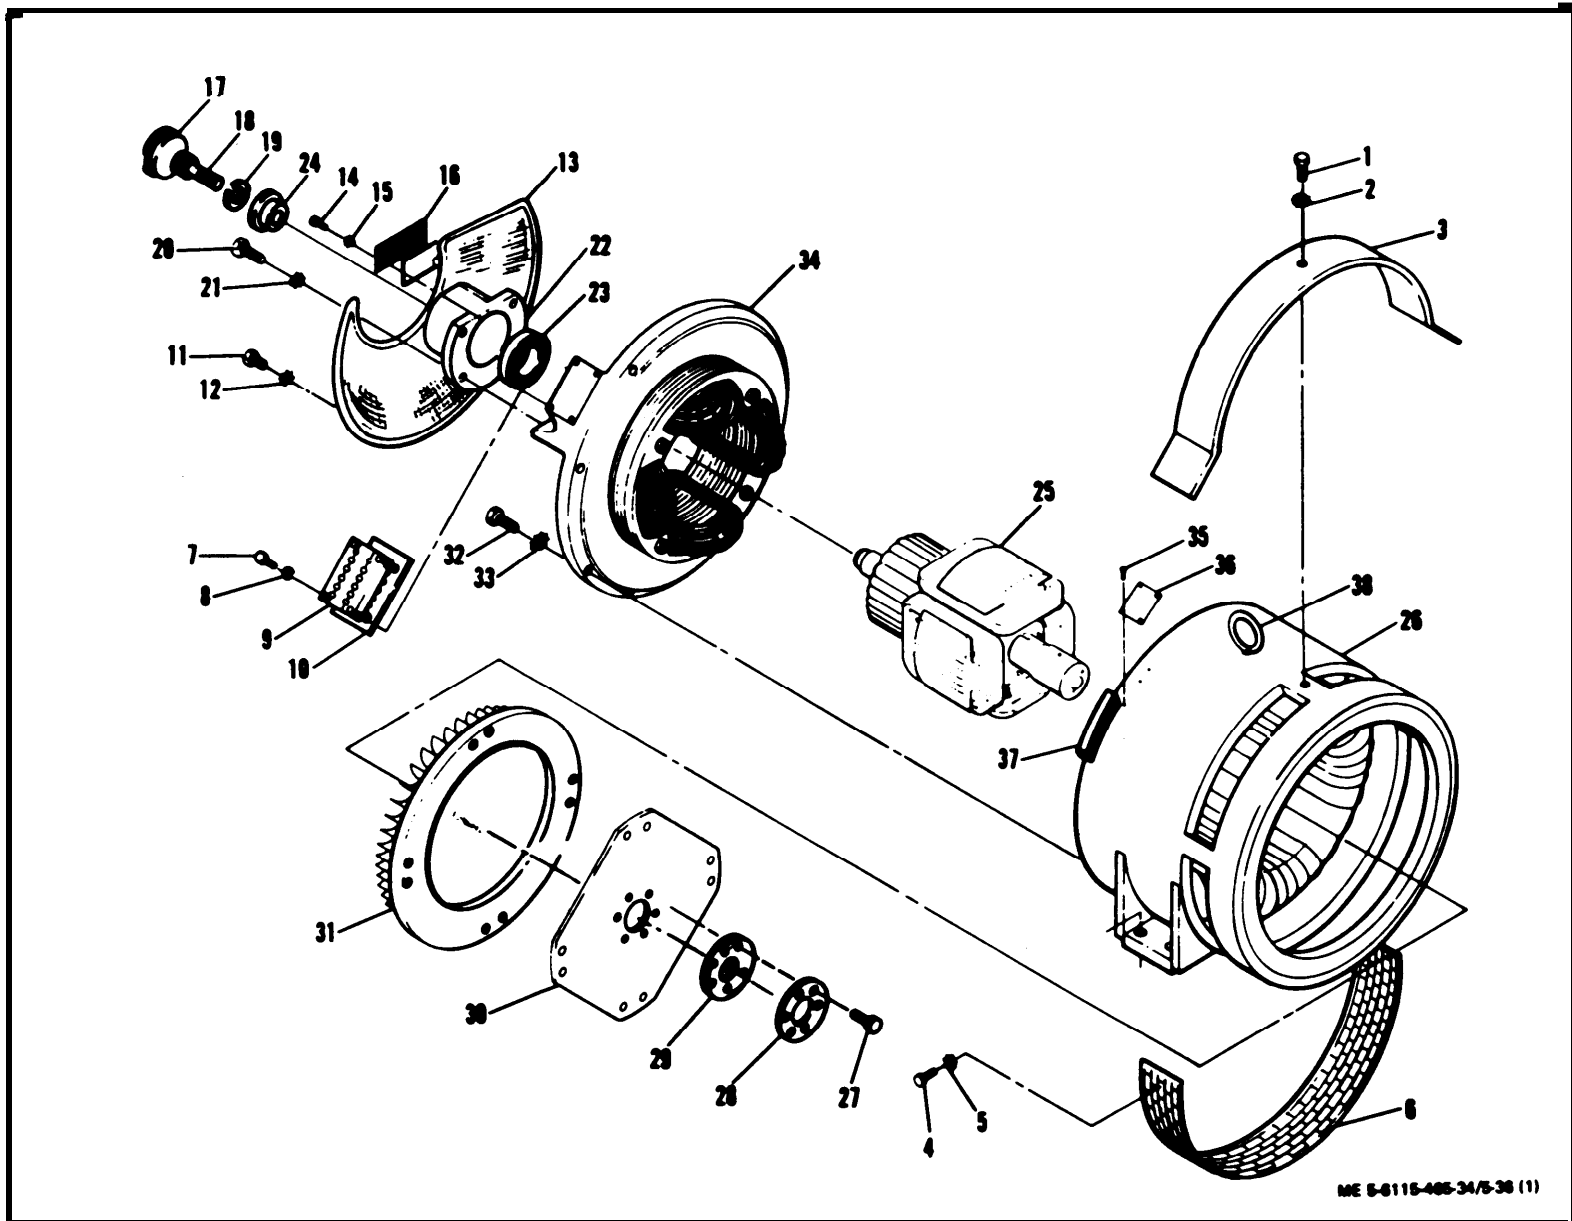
Generator Assembly, Exploded View (Sheet 1 of 2)
